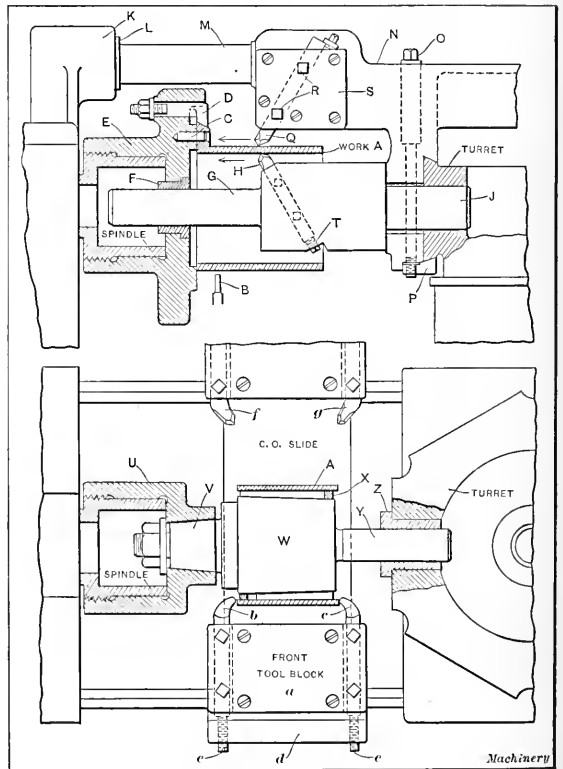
Machining a Sliding Sleeve in a Turret Lathe
